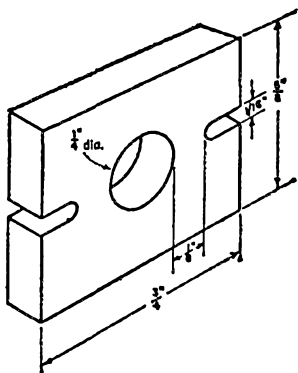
Dimensions of the insulating spacers used to hold bridge wires and outer conductor strips in place.
